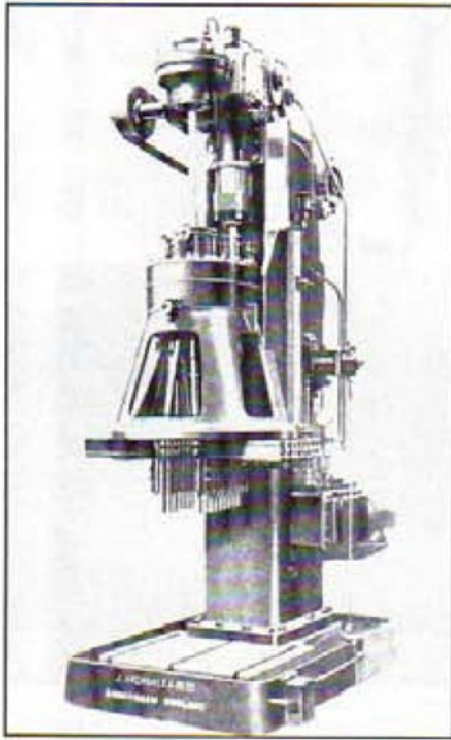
Archdale 36 spindle multiple drilling machine, c 1930
